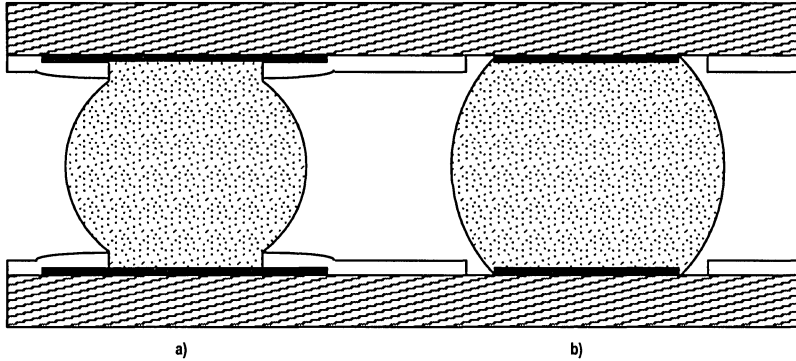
Comparison of PBGA Solder Joints with: a) soldermask-defined pad and b) conventional non-soldermask defined pad. Note the greater volume of solder and greater effective joint diameter for the non-soldermask defined pad to achieve the same stand-off.
